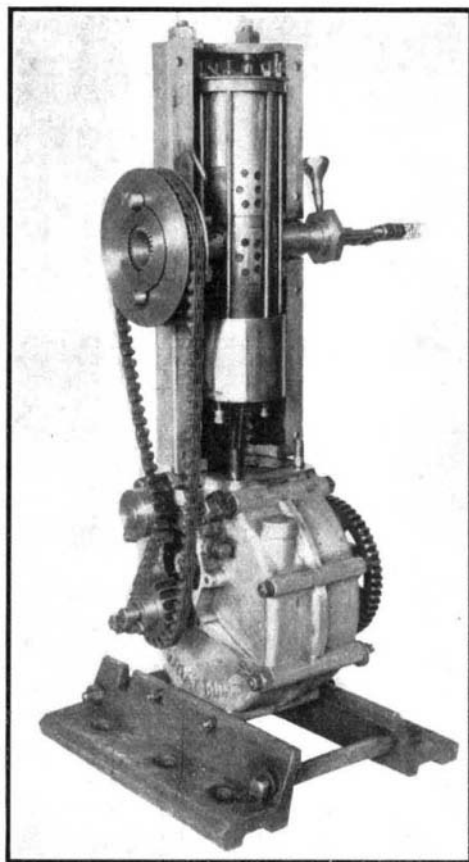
Motor With Half of Cylinder Casing Removed.
